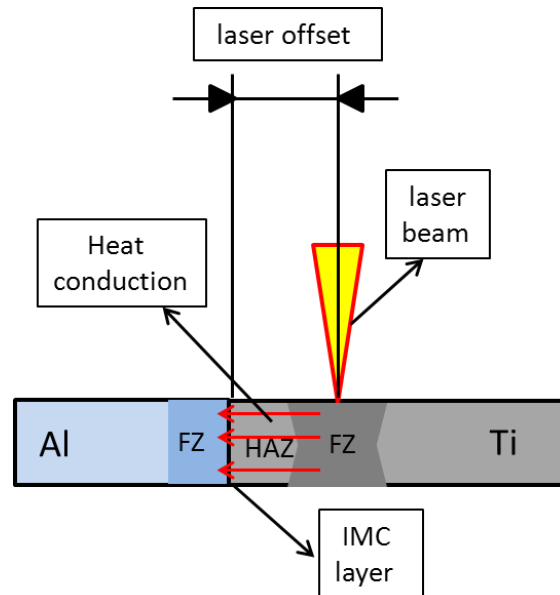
Laser offset welding configuration for Al-Ti dissimilar butt joints
